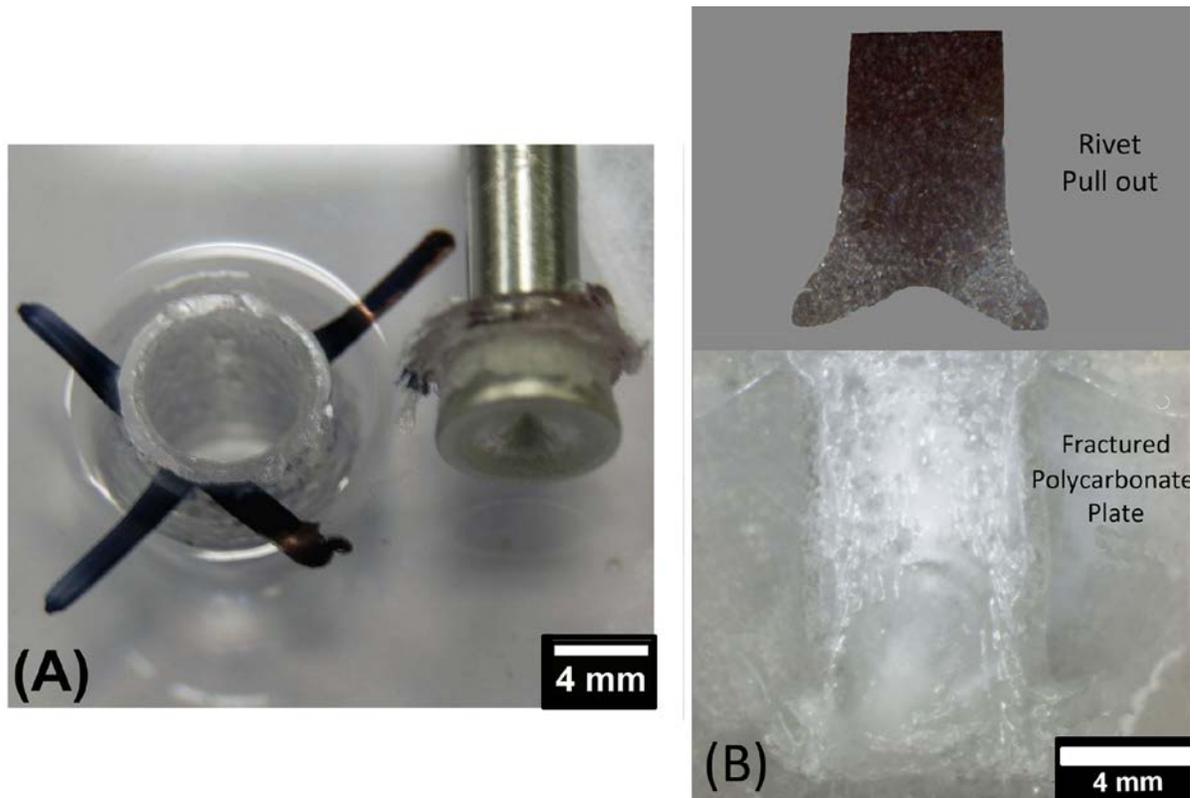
Type-III fracture observed in joining Conditions 5 and 7. (A) Specimen after tensile T-Pull testing. (B) Cross-sectional view of the fractured specimen.
